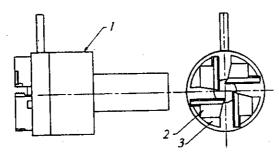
Self opening type die holder 1. Die holder body, 2. Dies, 3. Die holder.
